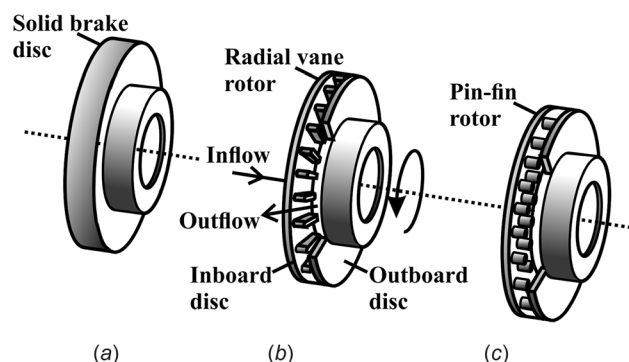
Schematic of typical brake rotor configurations: (a) solid disk, (b) radial vane disk, and (c) pin-finned disk
